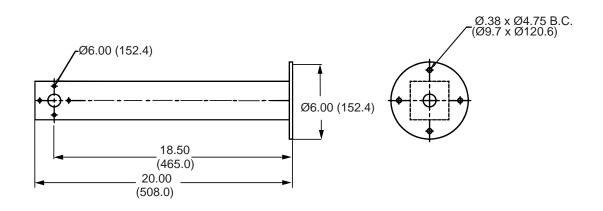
Dimensions, Wall Mount Arm. Dimensions in inches and (mm) (CohuHD p/n 7411417-001)
